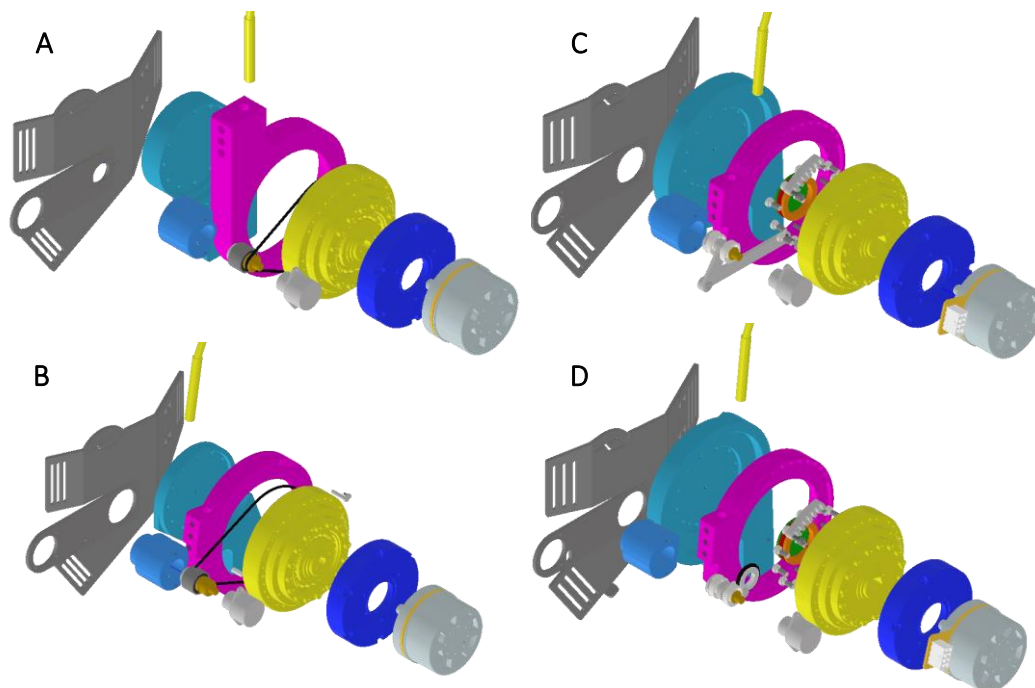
Exploded view drawing of the four proposed solutions: (A) powered joint with O-ring drive belt transmission, (B) powered solution with O-ring drive belt transmission and modified flanges of connection, (C) powered solution with four-bar linkage mechanism for the motion transmission, (D) final powered solution with a freewheel mechanism for the motion transmission.
